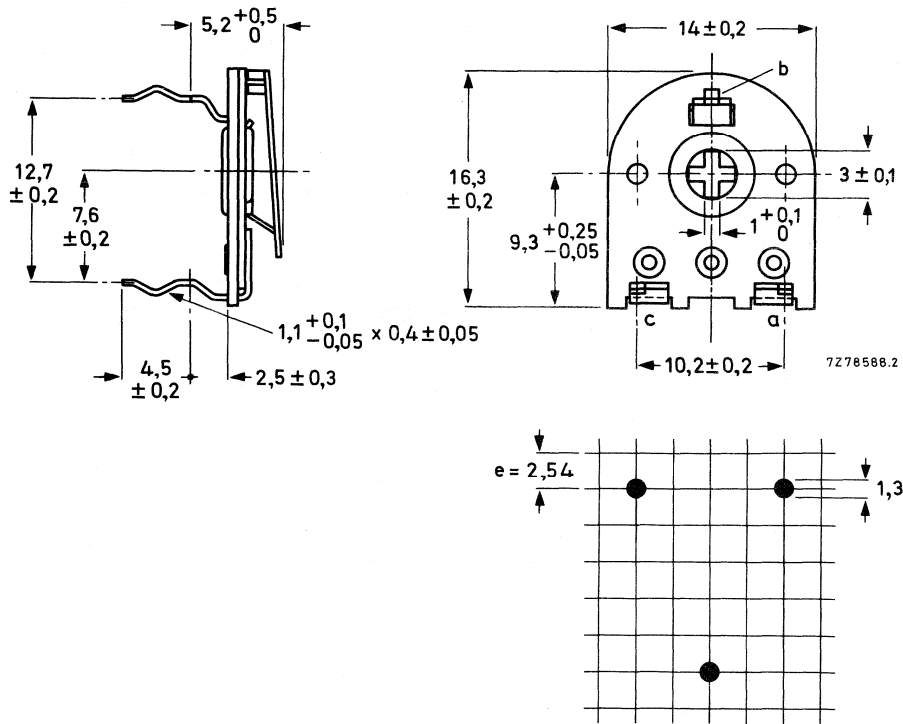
Potentiometer for horizontal mounting, with snap-in printed-wiring pins, 2322 409 033..
